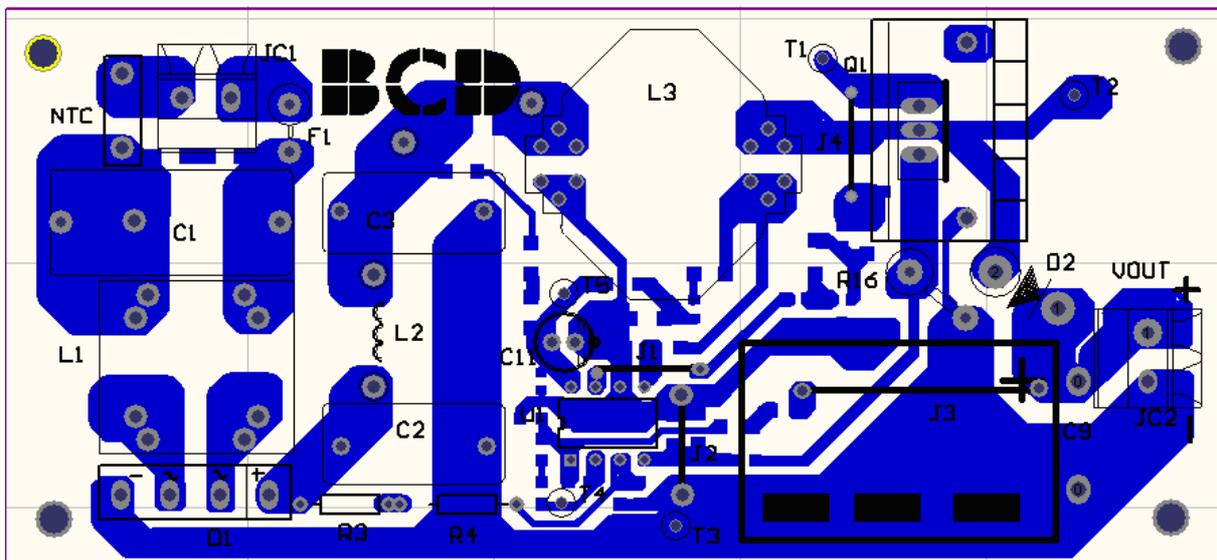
Demo Board PCB and Component Layout (Bottom View, 125mm×56mm)
